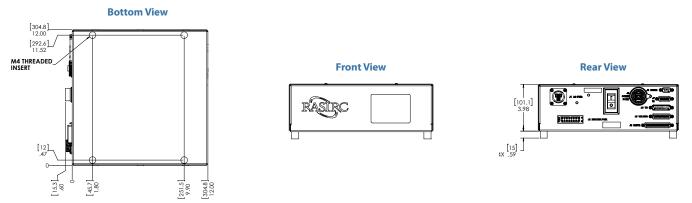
Electronics box mounting dimensions. Must be mounted within 3 meters of the chemical cabinet.
